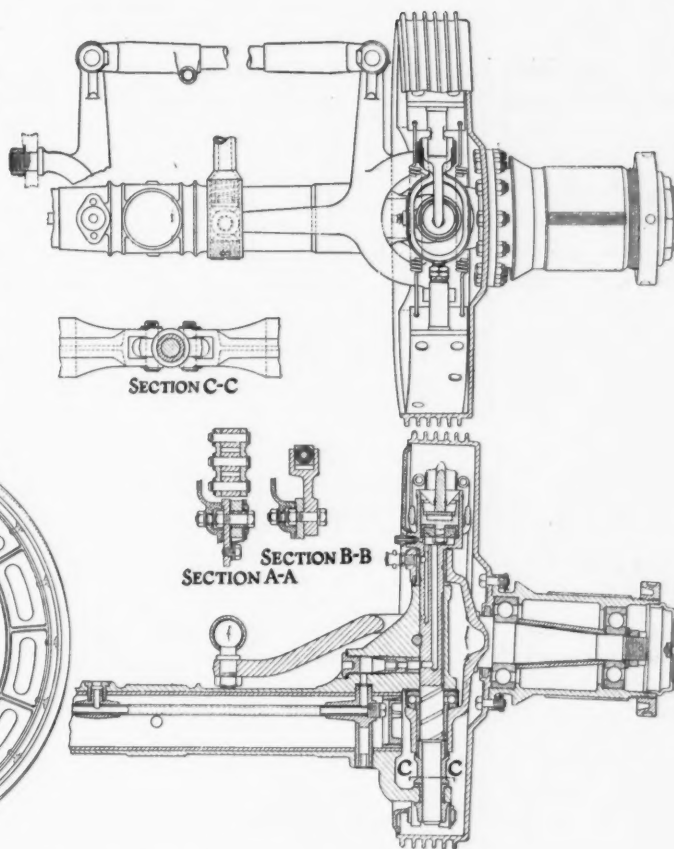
Arrangement of hydraulic brake on Duesenberg front axle
